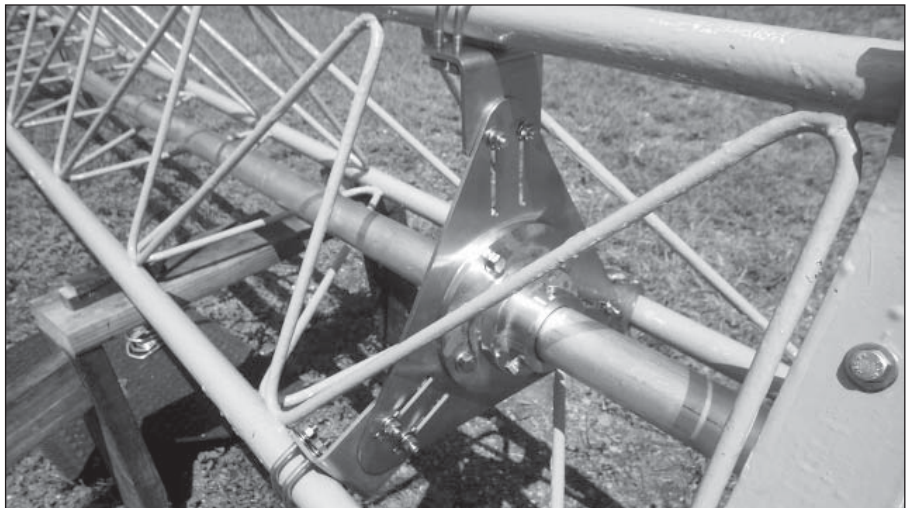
A stainless-steel accessory plate from DX Engineering supports a PJ2T stainless thrust bearing.
